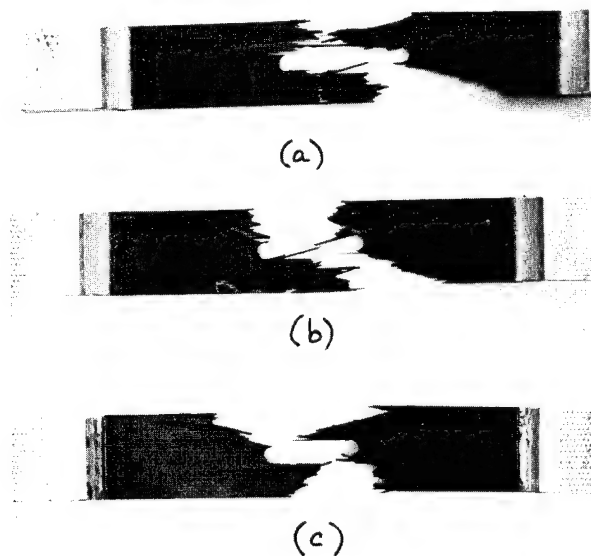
Tensile Fatigue Specimens B (3 Hertz);
